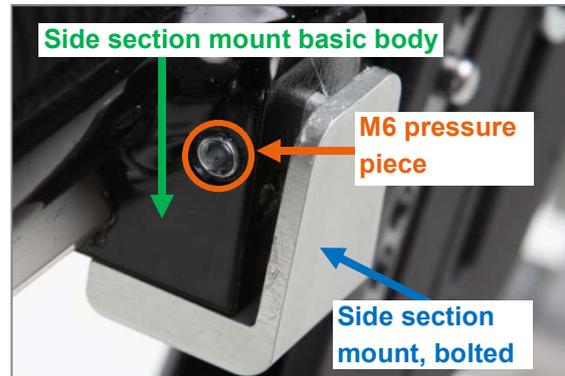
M6 pressure piece screwed into "basic body of side section mount"
